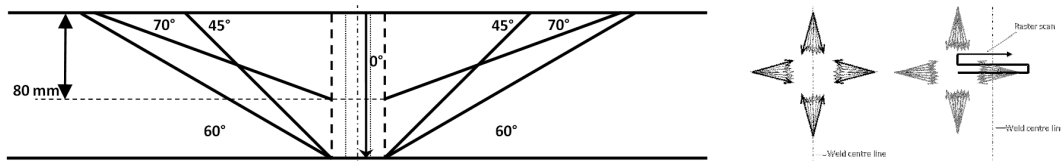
Weld coverage using beam steering and skewing with phased array pulse-echo techniques
